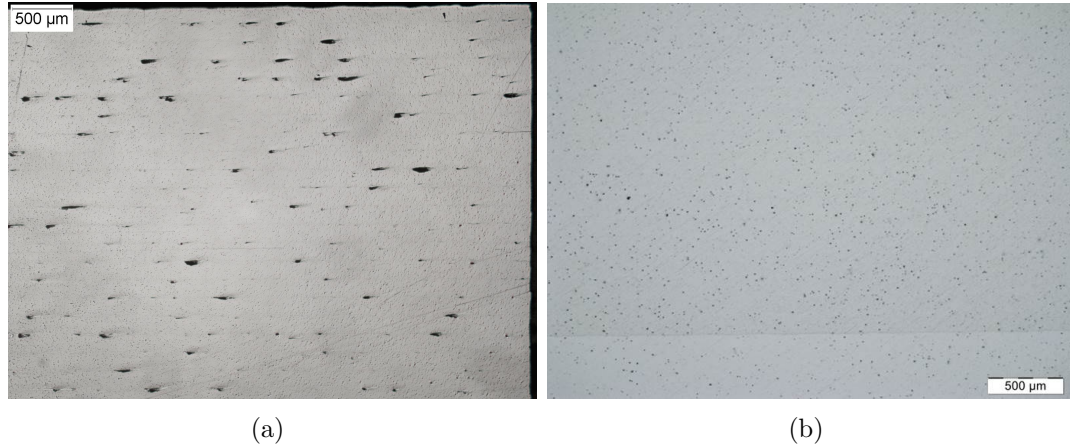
Cross sections from (a) 1 kW UAM welds with Al 3003 and (b) 9 kW UAM welds with Al 6061 [87].
